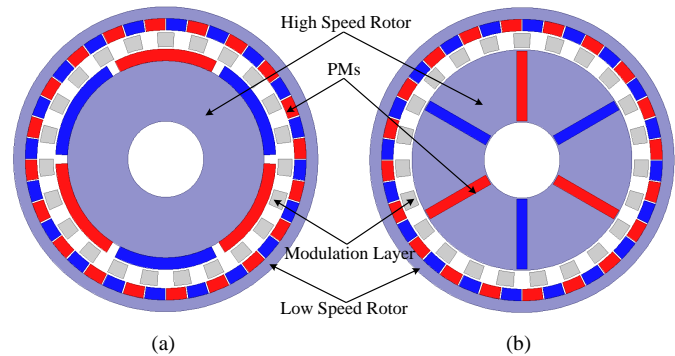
Two typical magnetic gears. (a) Surface-mounted-type magnetic gears (b) Spoke-type magnetic gears
